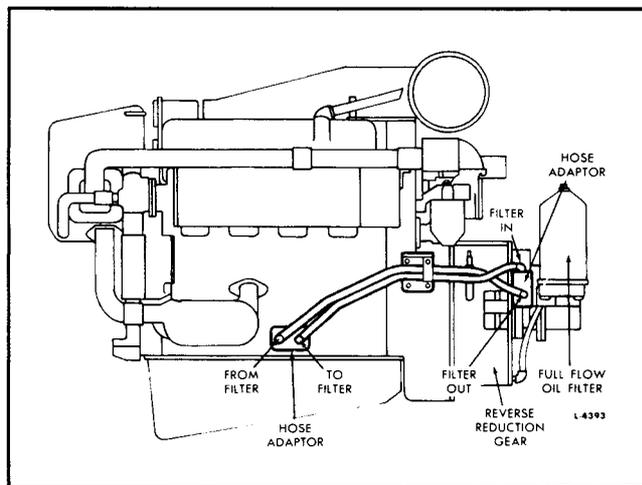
Proper Installation of Flexible Oil Filter Hoses
